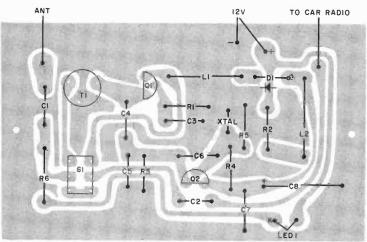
Etching and drilling guide (top) and component placement for the converter.
